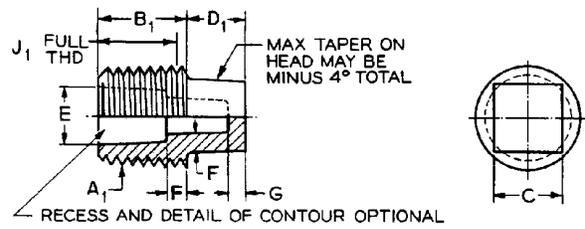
B—SQUARE INSIDE HEAD FILLER AND DRAIN PLUGS^a (130109B)
